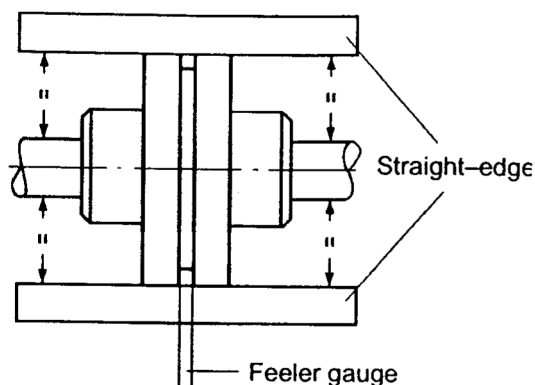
Alignment of the coupling with straight-edge and feeler gauge
